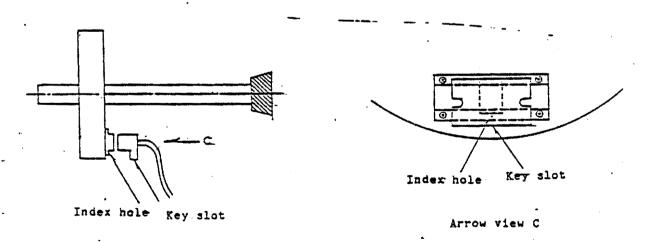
Mounting onto a flat surface on the load side of the rotating body
